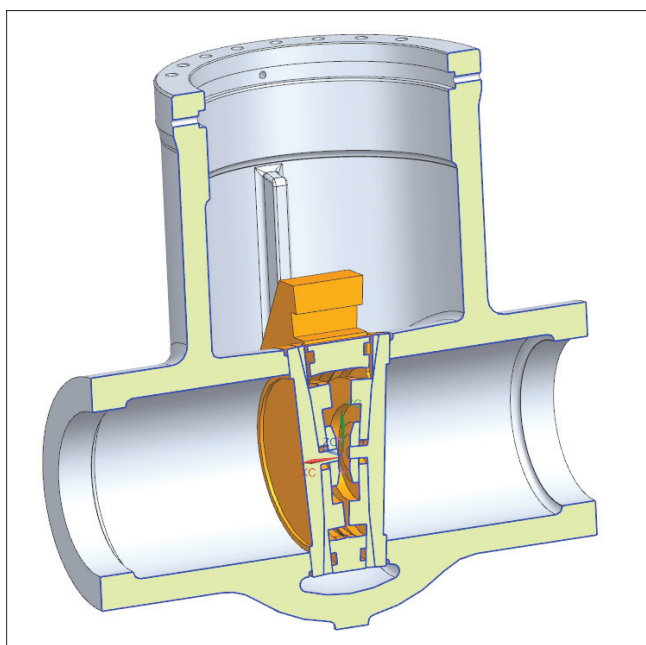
Cross-section of a double wedge installed in the body of the DN150 PN100 valve
